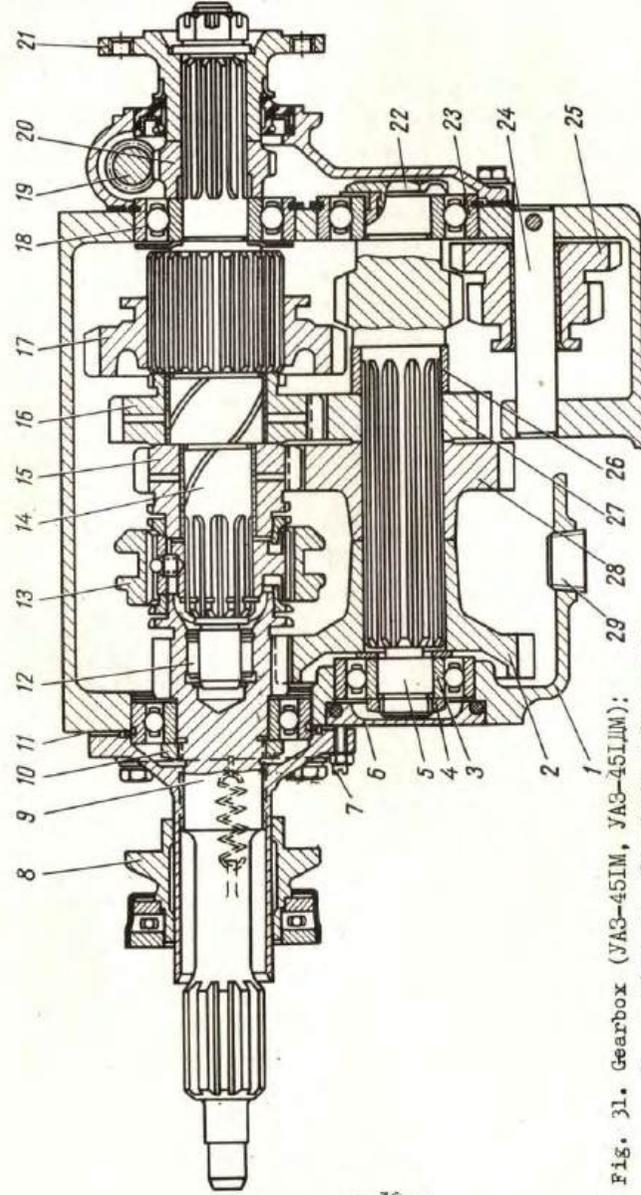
Gearbox (YAS-451M, YAS-451JM):
